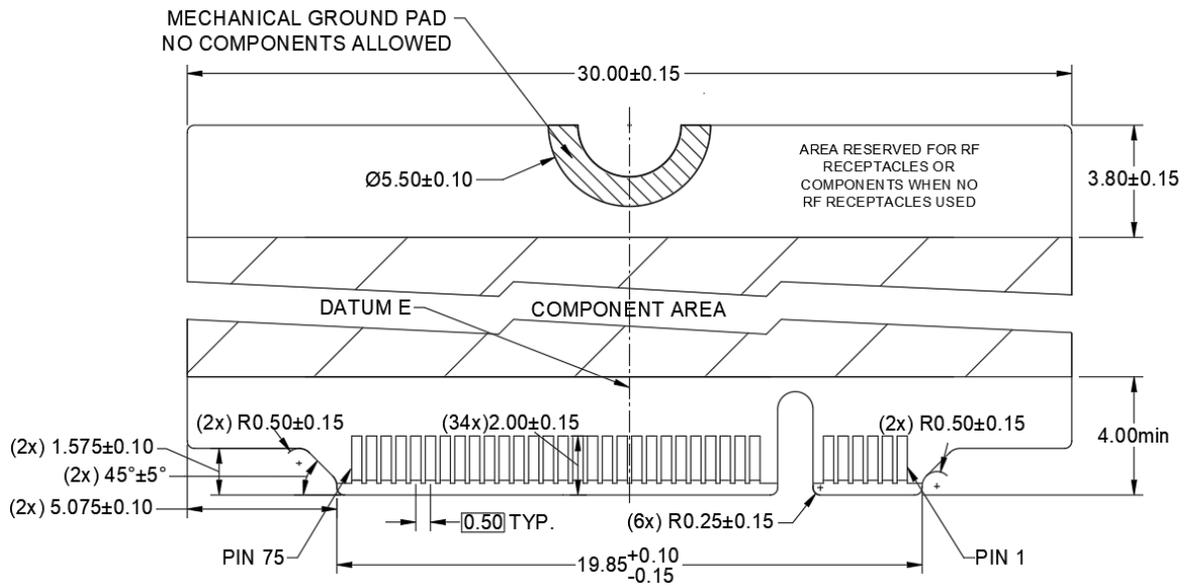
M.2 30XXX-XX-X-1A(B) Card Edge Outline Topside
